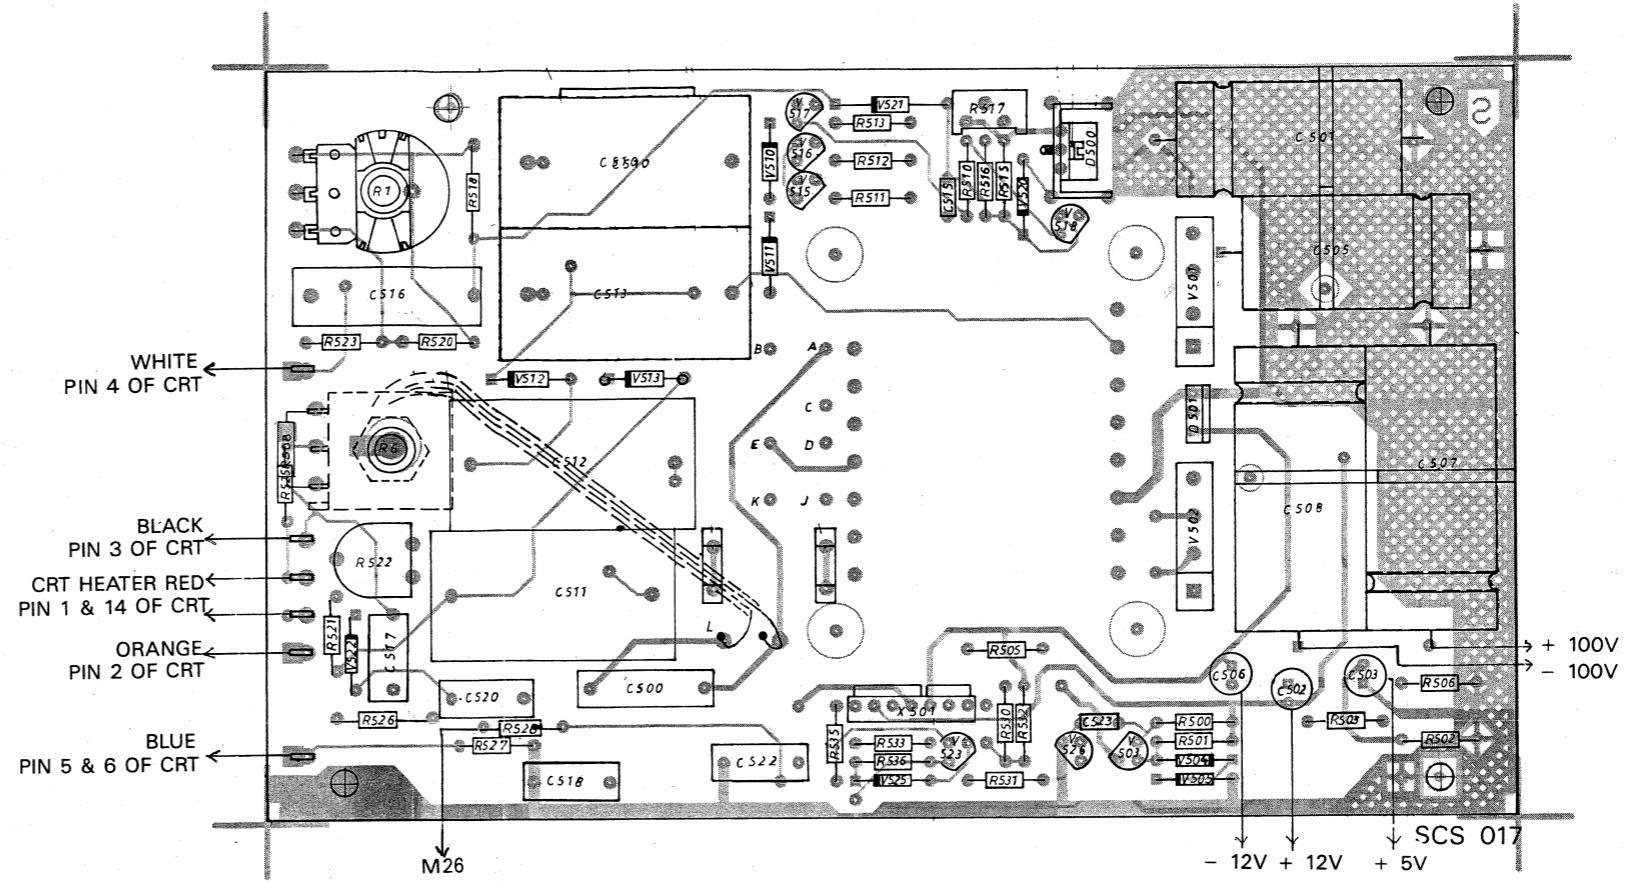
PCB OF POWER SUPPLY UNIT
